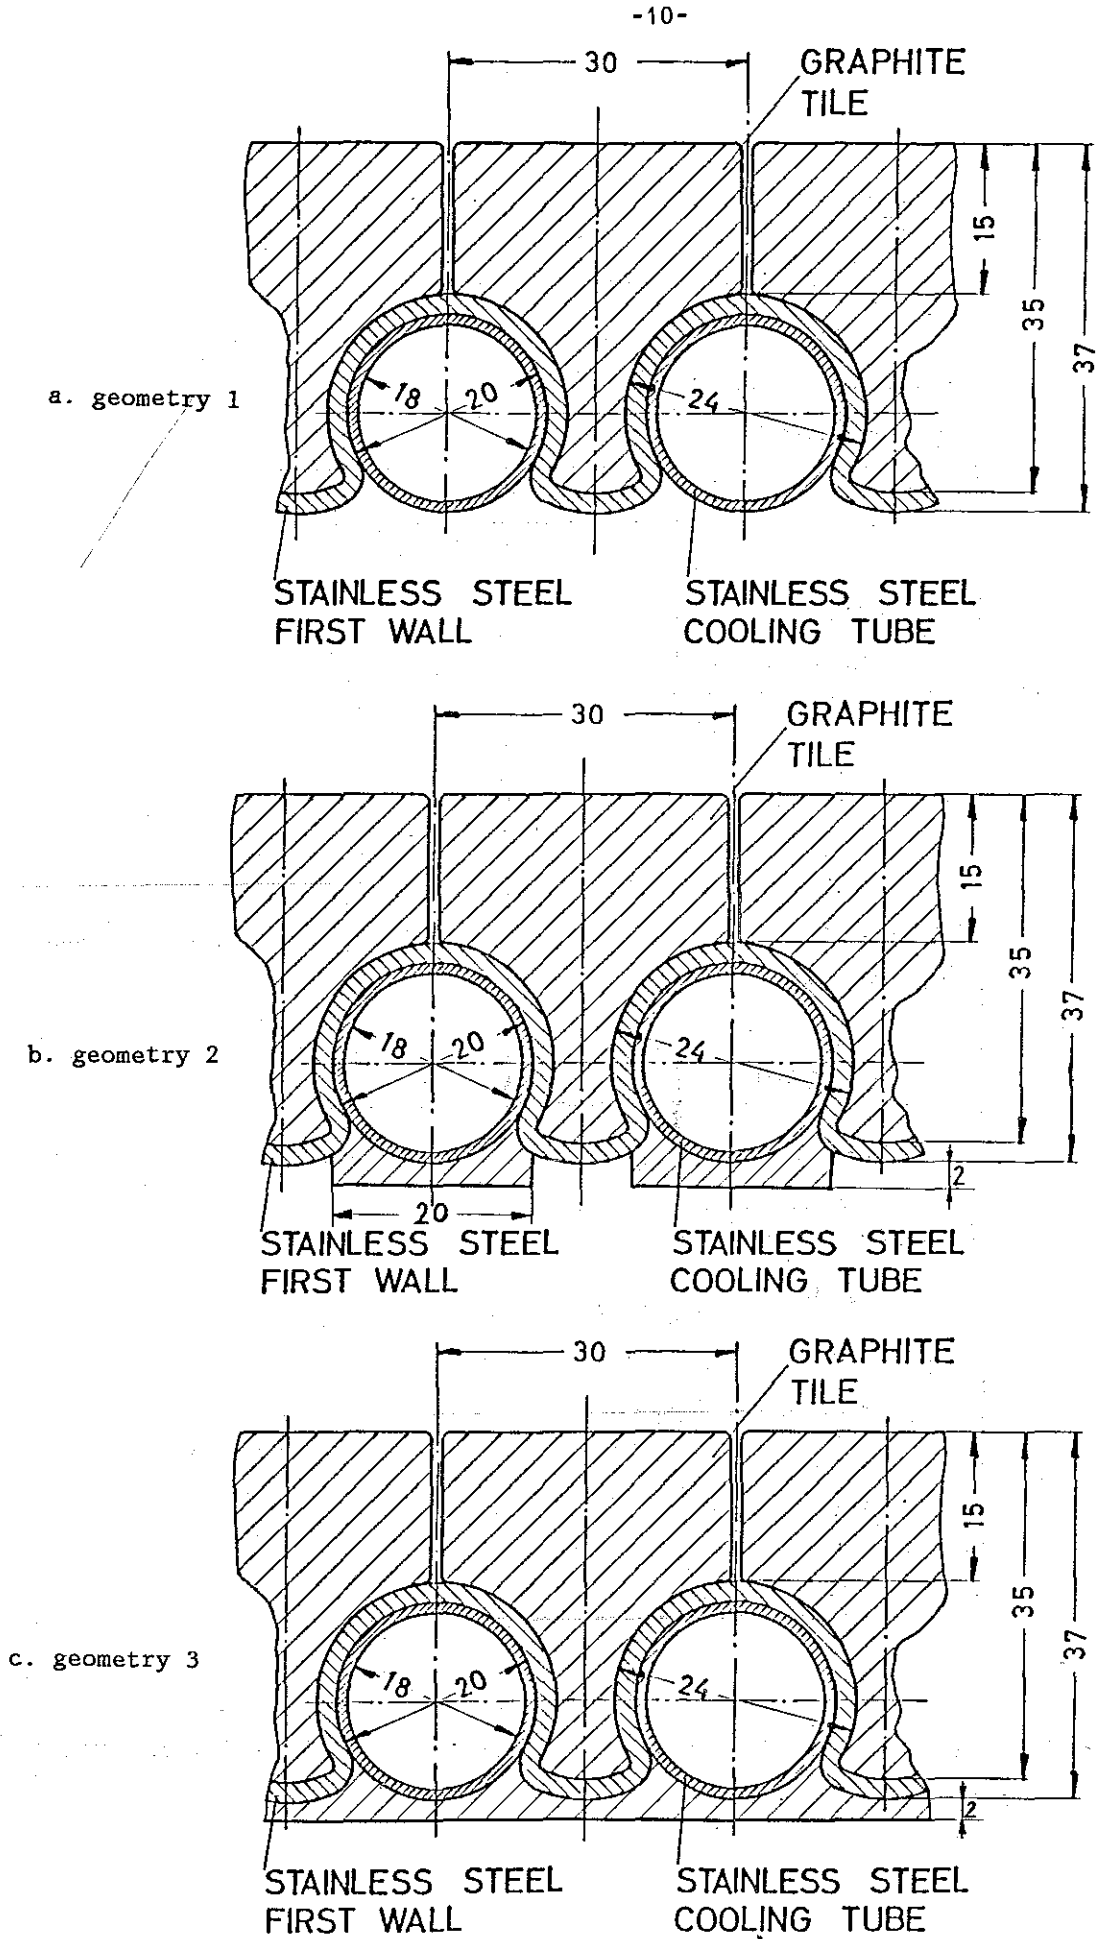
First wall designs with the tubes brazed inside the canisters (dimensions in millimeters).
